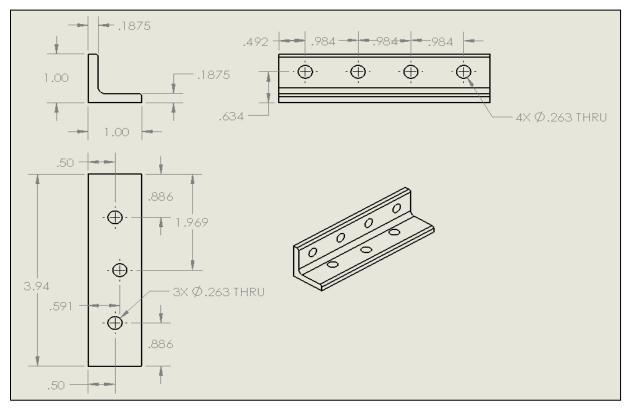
SolidWorks drawing used to make a single motor housing bracket; two are used in a single pinion motor housing assembly.
